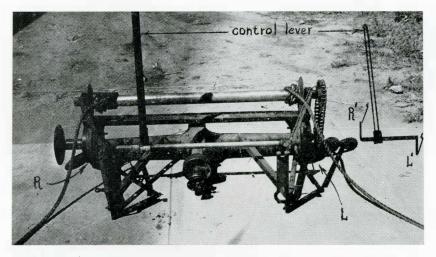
Hoisting unit, showing braces to quick-detachable brackets. (R is right hand side as one faces front of tractor.)
